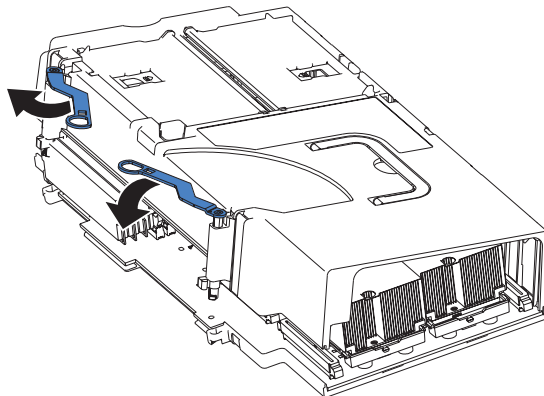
Fully extending the locking levers to remove the SMP Expansion Module cover
